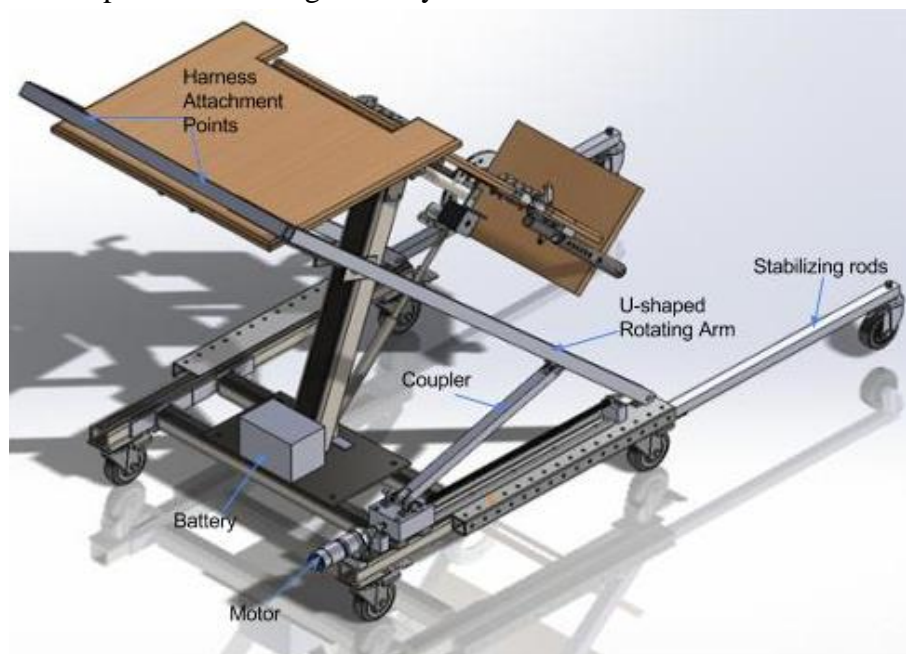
Solidworks Model of Final Standing Device in Stowed Position
